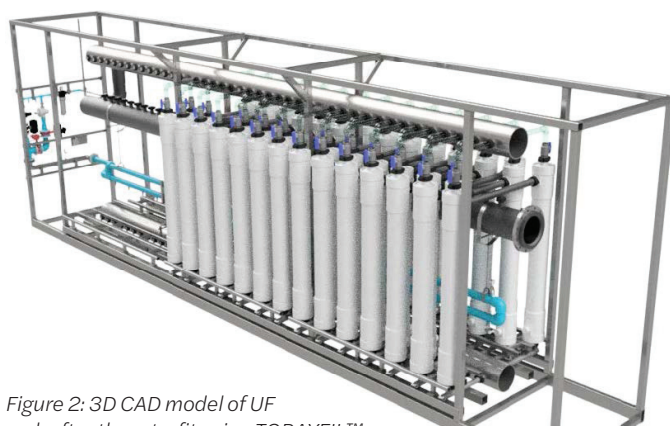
3D CAD model of UF rack after the retrofit using TORAYFIL™ showing additional room for expansion. Image courtesy of WesTech Engineering, Inc.
